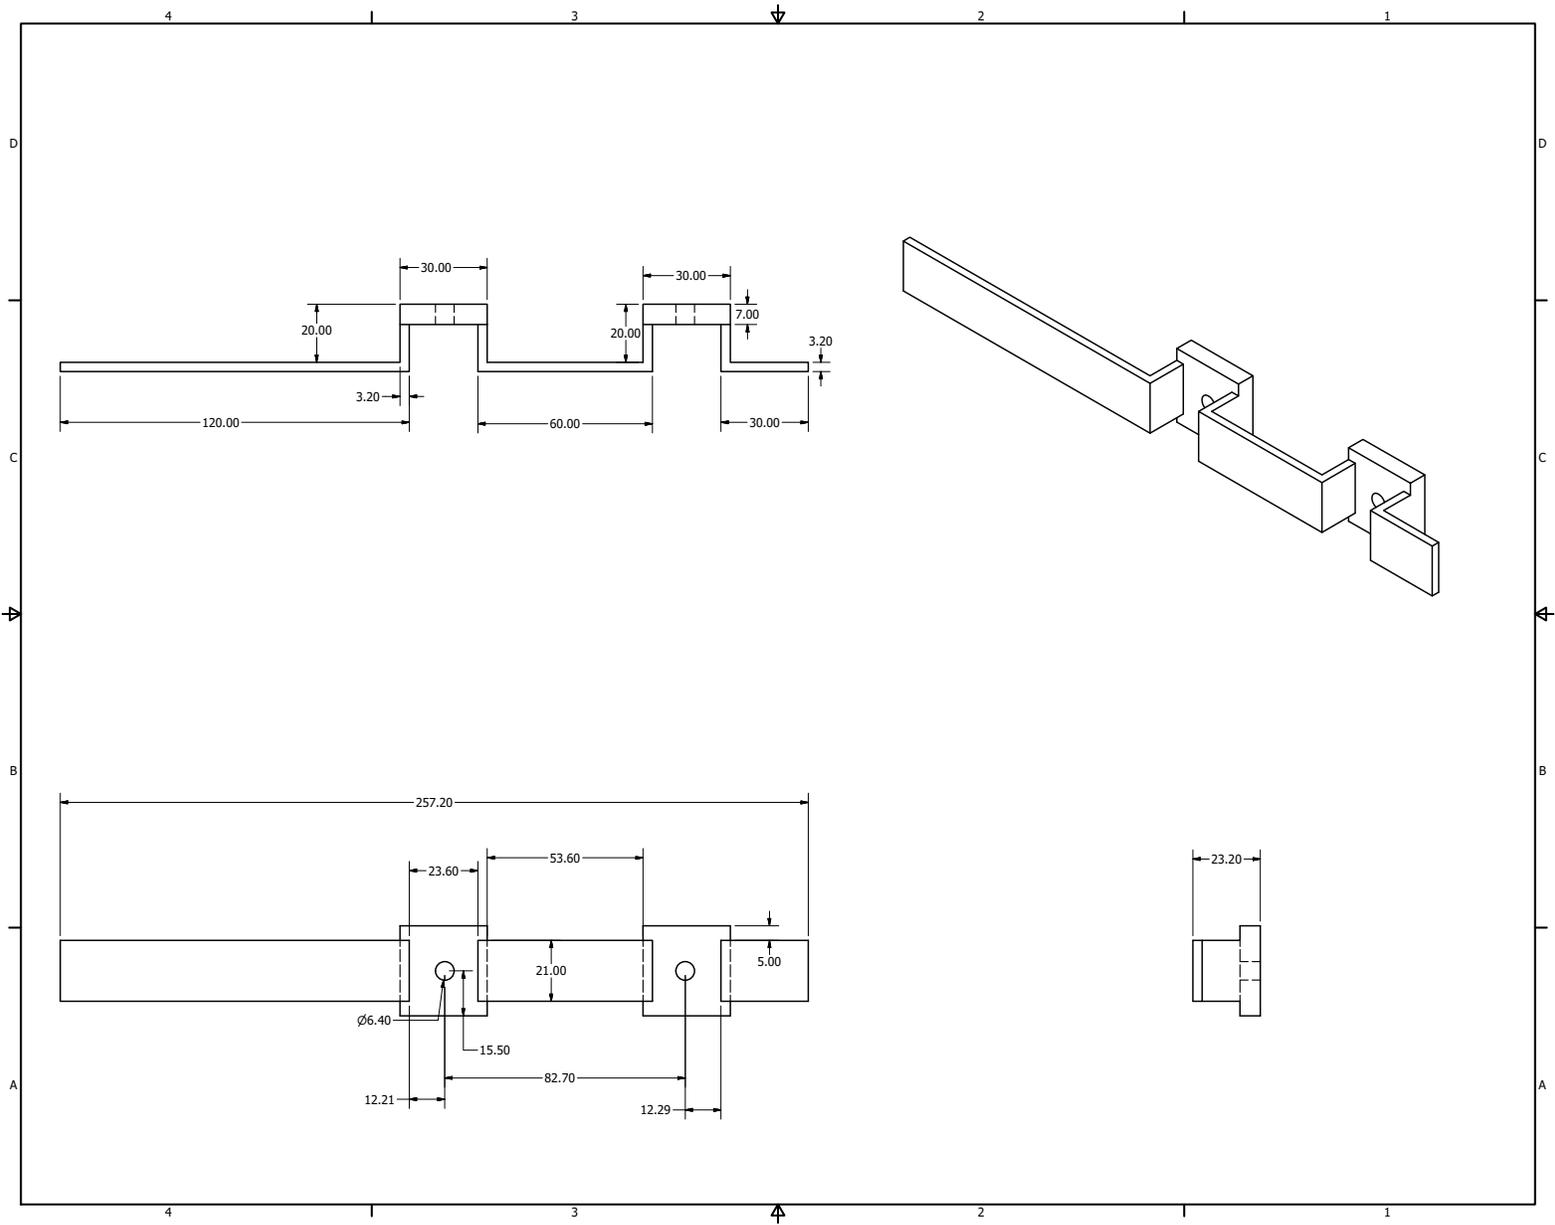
Bracket Design from Sketches in Figure 23 made in AutoCAD Inventor
